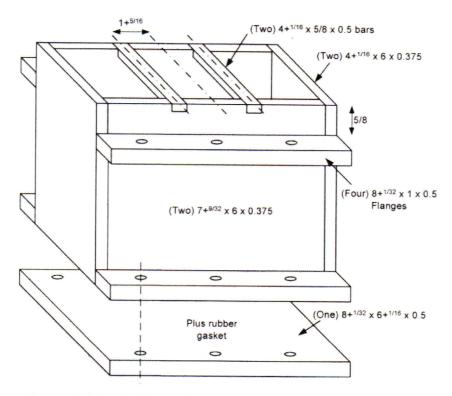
Scaled Drawing of Model Plexiglas Deck Drain
